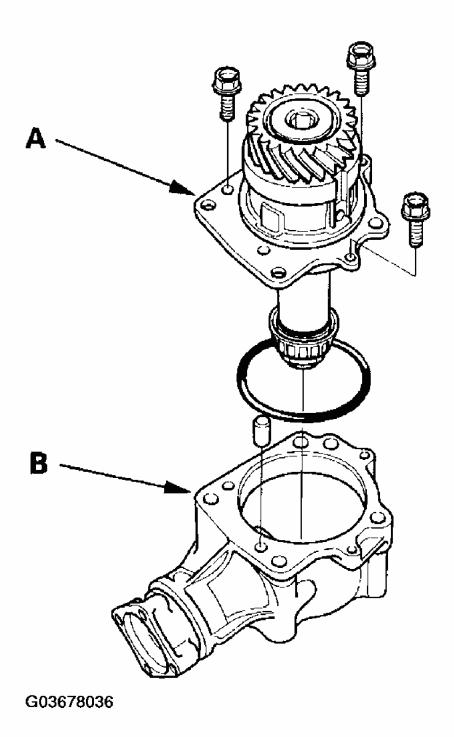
Removing Transfer Holder Assembly From Transfer Housing
